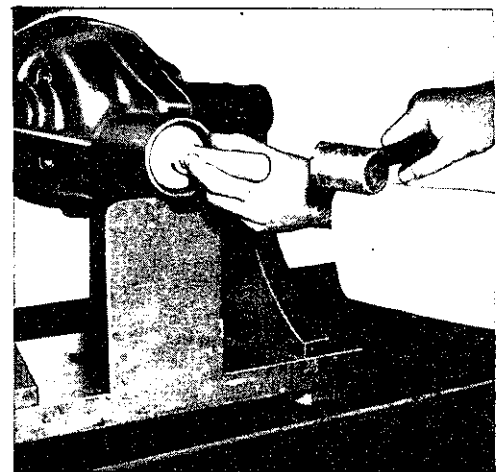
PINION SHAFT FRONT BEARING CUP DRIVER
